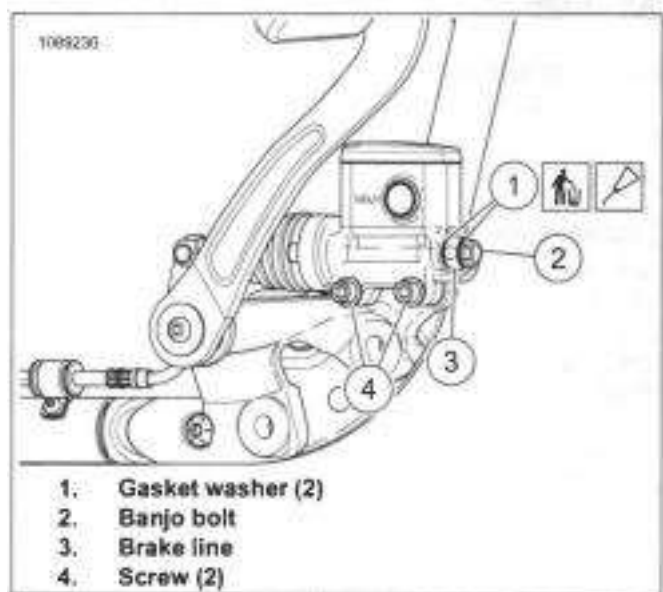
Rear Master Cylinder - Front View: (exhaust remove for clarity)
